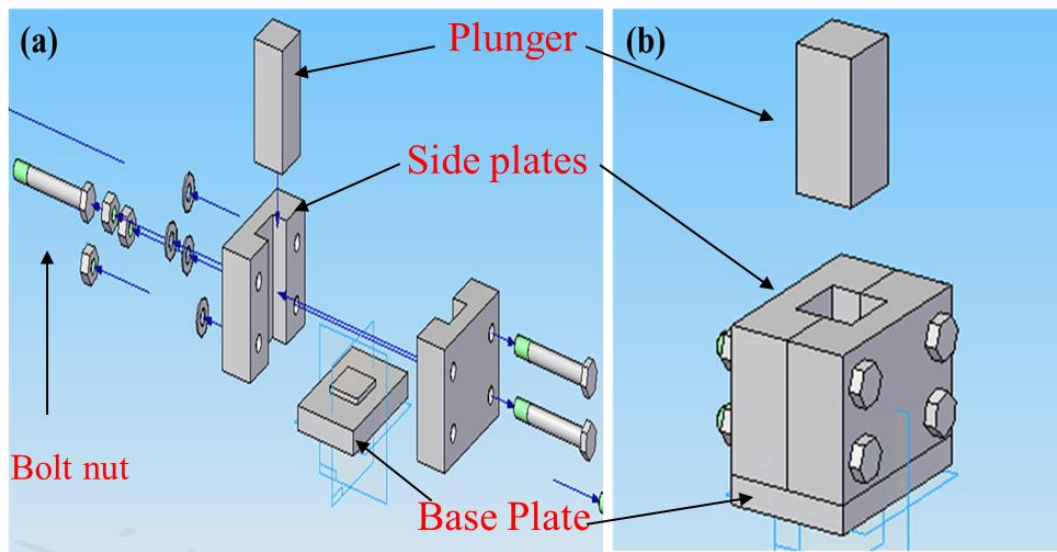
CAD model of (a) Exploded view (b) Assembled view
